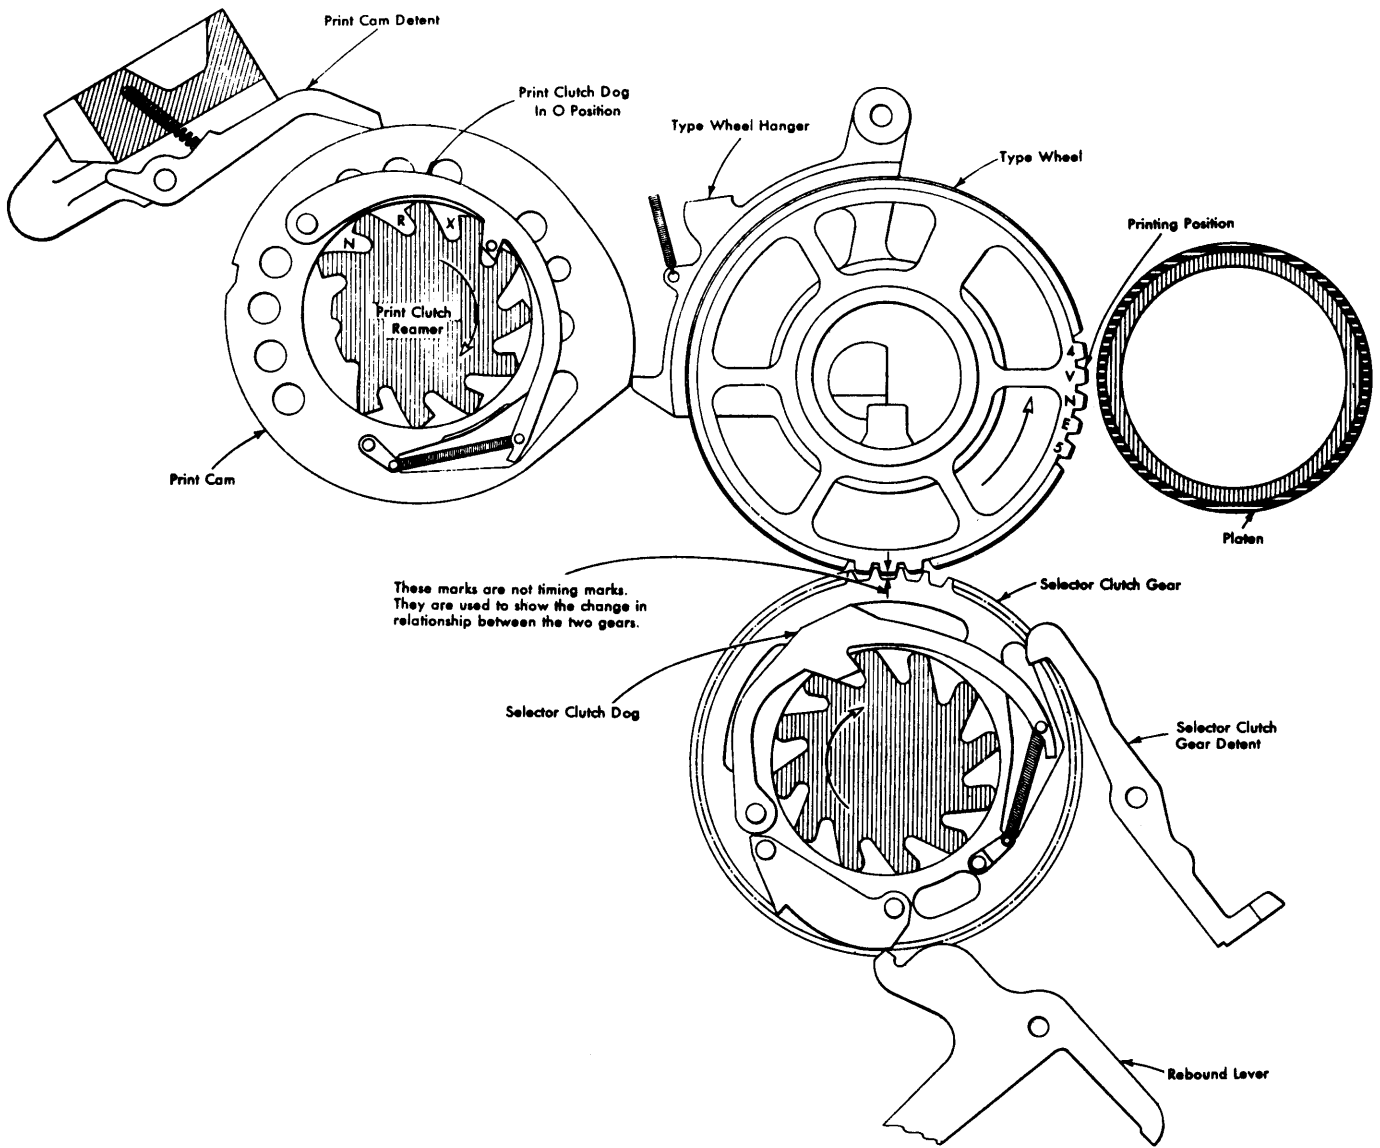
IBM 407 Print Mechanism Positioned for Printing V
